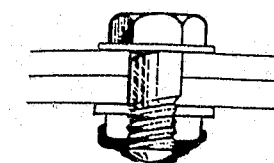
Cross section of a bolt with the nut spot welded. This can be done to secure metal signs to metal posts.
